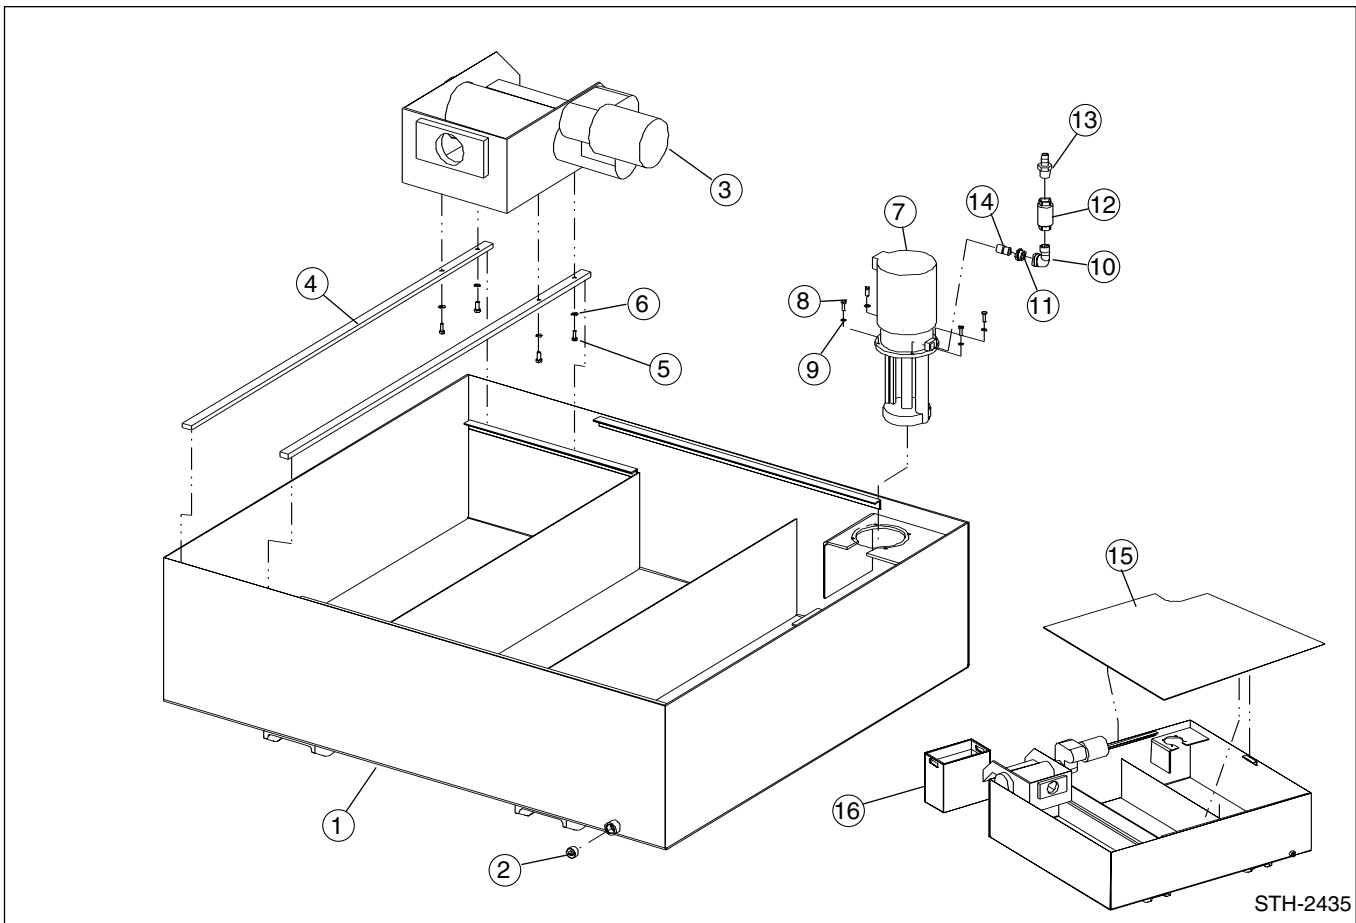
FIGURE O - COOLANT TANK ASSEMBLY, 500L SKID TYPE
